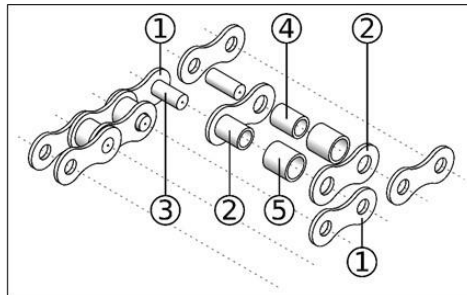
Main components of roller chain. 1 outer (external) plate; 2 inner (internal) plate; 3 solid pin; 4 bushing; 5 roller.
